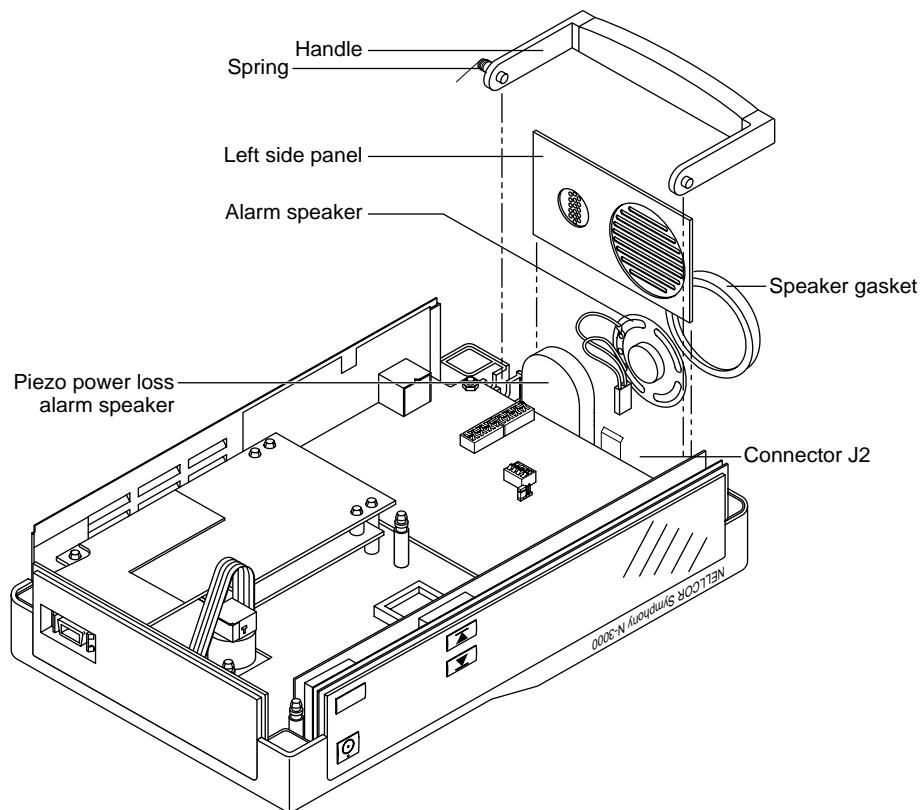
Handle, Left Side Panel, and Speaker Disassembly
